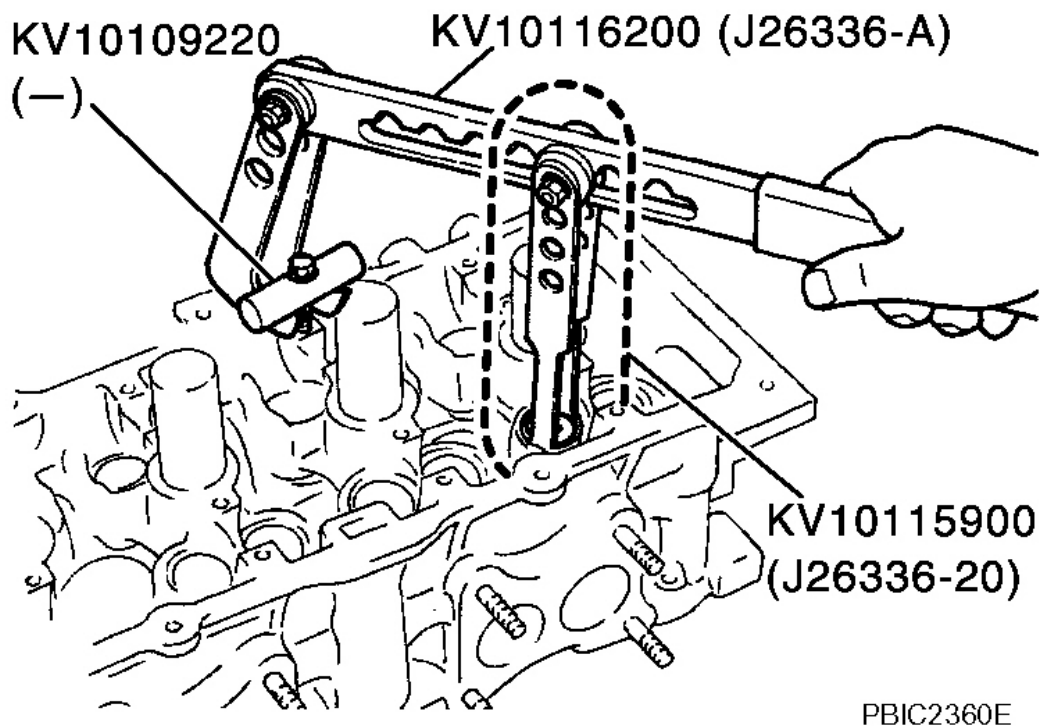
Installing Valve Collet By Compressing Valve Spring
